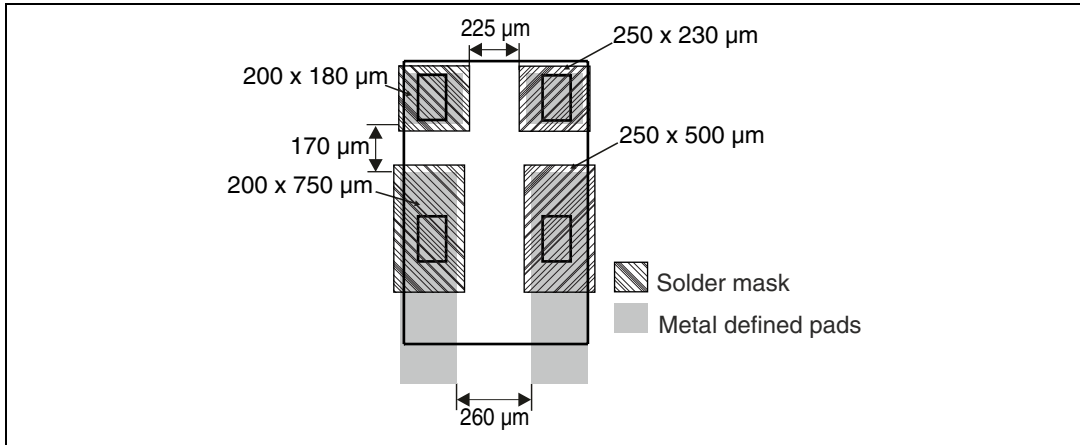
Flip Chip dimensions (size for 3p9, 4p7)
